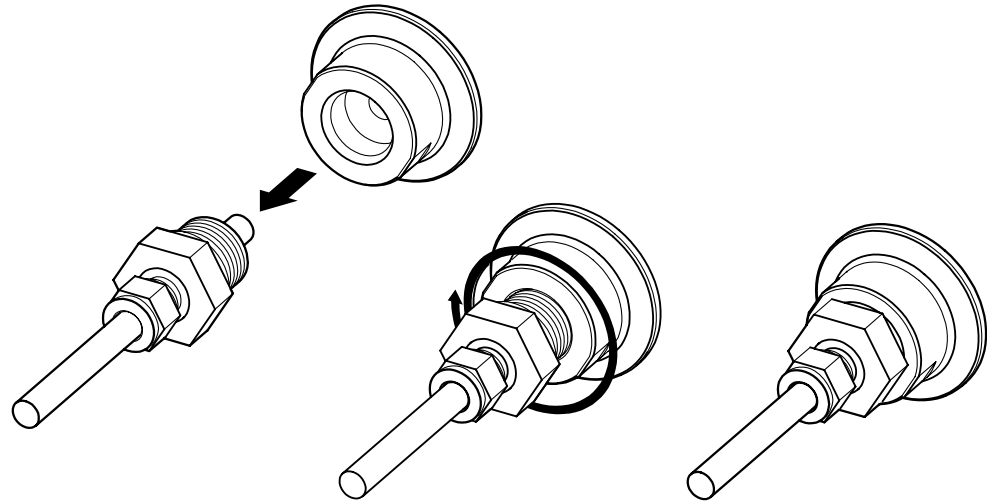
Mounting the process connector adapter on the hygienic clamp adapter
